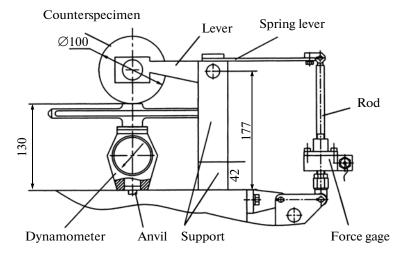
Schematic of calibration of contact load control system of SI-03M test machine.
